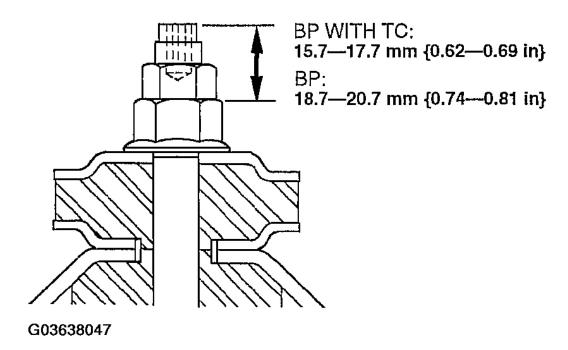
Tightening Upper Nut Courtesy of MAZDA MOTORS CORP.
